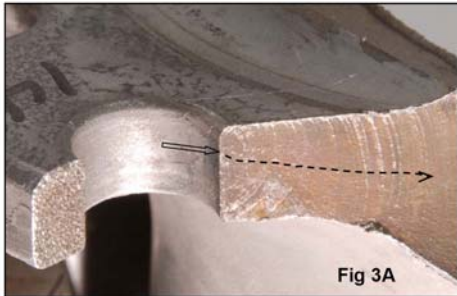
A & 3B: Photographs showing fracture surface details.
